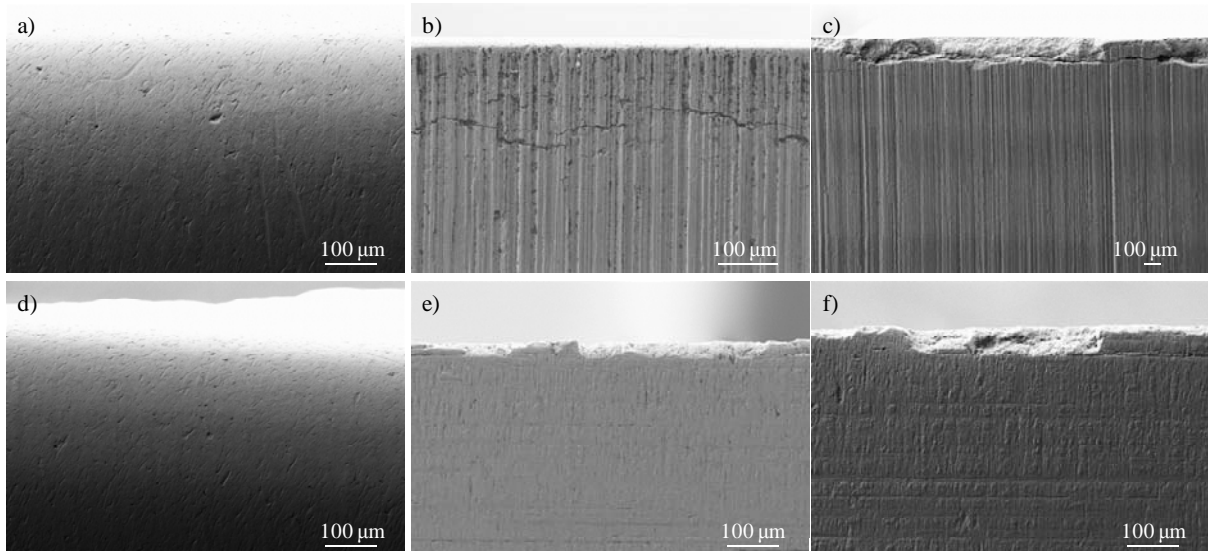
Fractography of the lower 1.2379 tools: a) flank face of the tool with radius 500 μm after 22000 strokes; b) flank face of the tool with radius 10 μm after 8000 strokes; c) flank face of the tool with radius 10 μm after 22000 strokes; d) rake face of the tool with radius 500 μm after 22000 strokes; e) rake face of the tool with radius 10 μm after 8000 strokes and f) rake face of the tool with radius 10 μm after 22000 strokes
